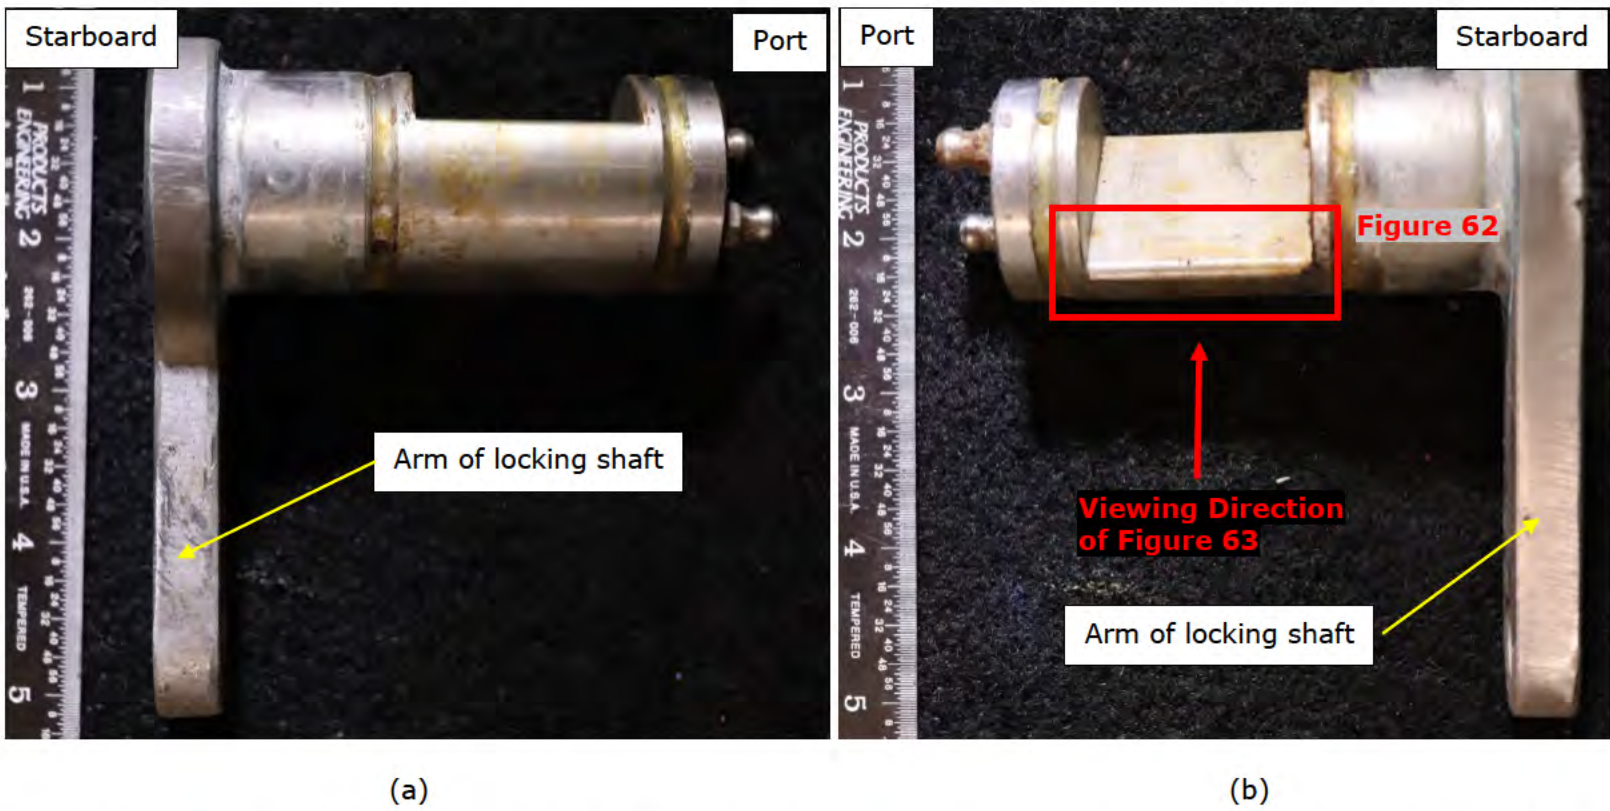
Photographs of the locking shaft from the Subject Aft Hook showing the (a) round side and (b) the flat, after disassembly. Rulers are in inches.
